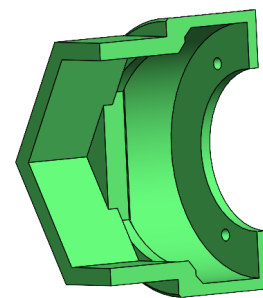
Assembled rotor and the spacer used while glueing the magnets
